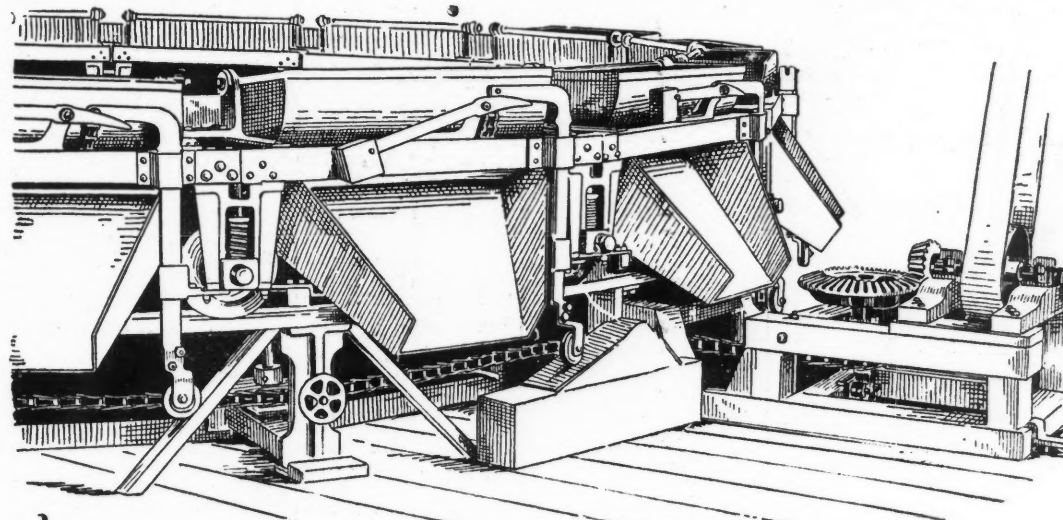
JEFFREY CONVEYOR FOR HOT ORES FROM ROASTING FURNACES.
